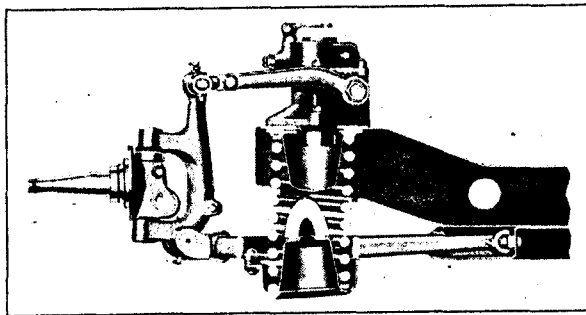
Sectional view of the left front wheel suspension system viewed from the rear
